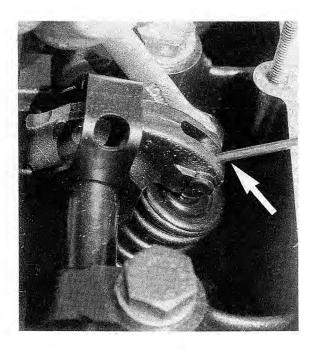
Valve clearance being adjusted. Stiff wire hook inserted into hole in eccentric (arrow).
